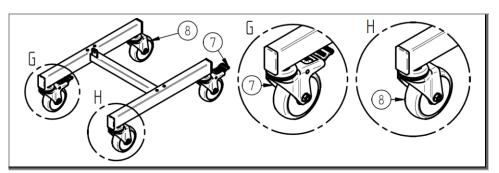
Parts list: Support placement option HE/HM casters with bolt hole ZZ.982.0068
